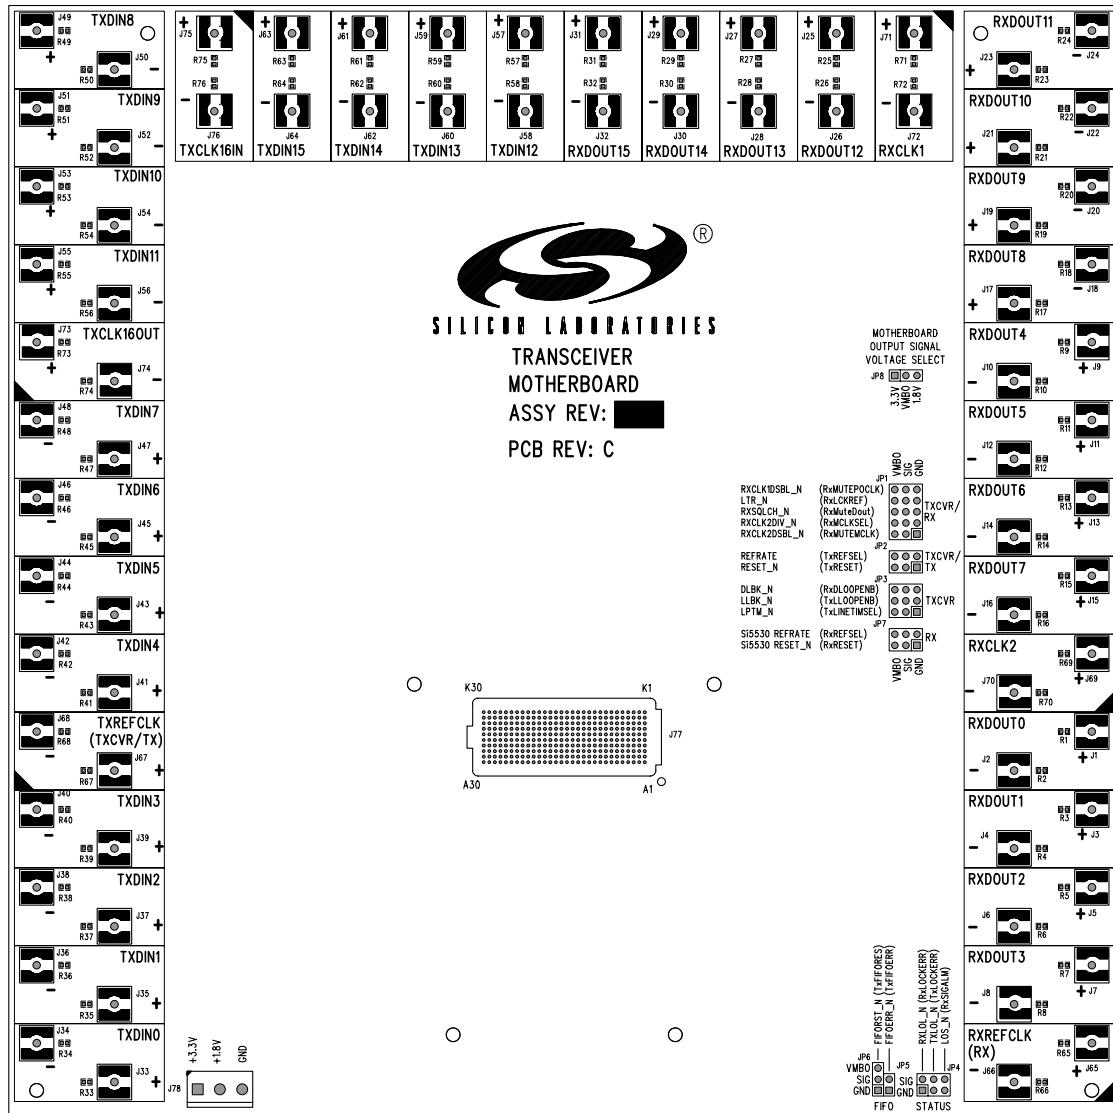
Component Side Assembly (Optional Full-Duplex Motherboard)
